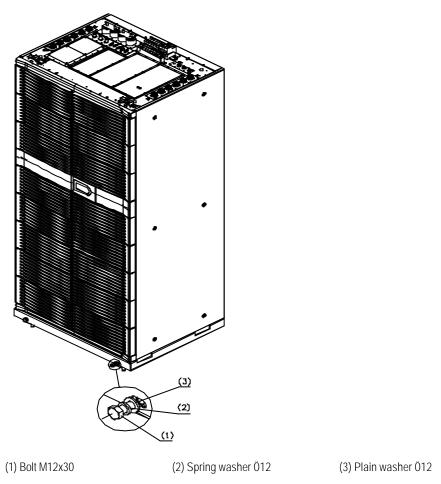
cBTS3612 Cabinet installation on the cement floor
